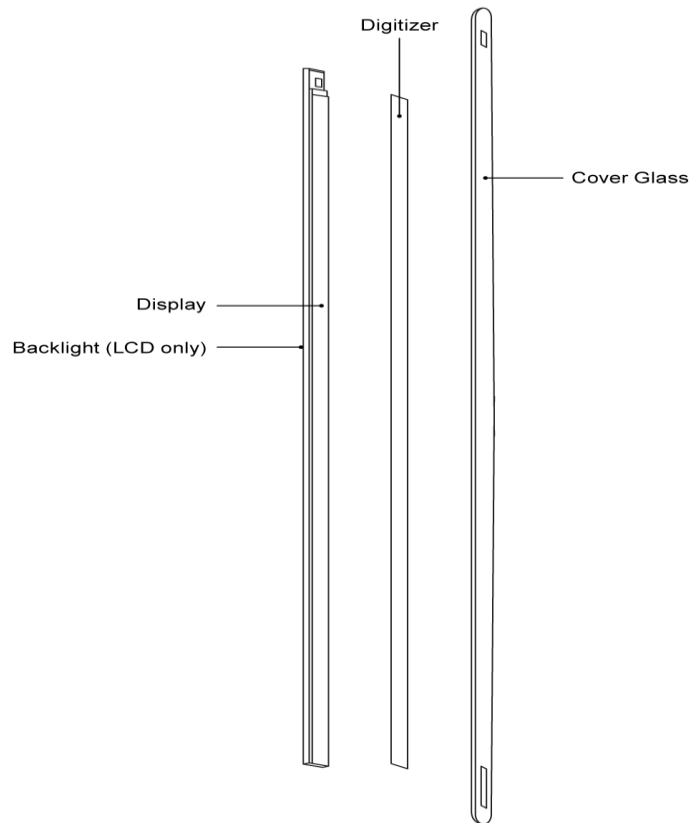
Top to Bottom Side View of Display Assembly
